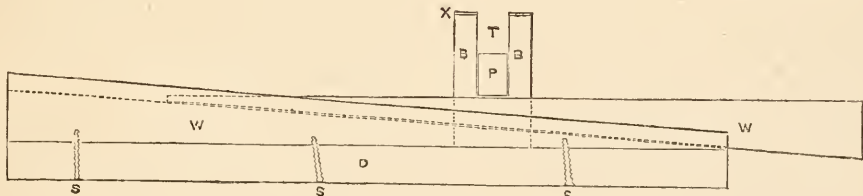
Diagram of Section-cutting Machine. Scale  $\frac{1}{4}$ .
